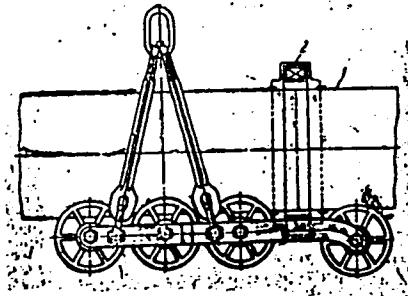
1 - welded pipe; 2 - annular welding transformer; 3 - holding roller; 4 - supporting roller; 5 - frame; 6 - hydraulic storage cell; 7 - hydroelectric drive mechanism; 8 - rod; 9 and 10 - trunnions; 11 - insulator; 12 - forward rollers
